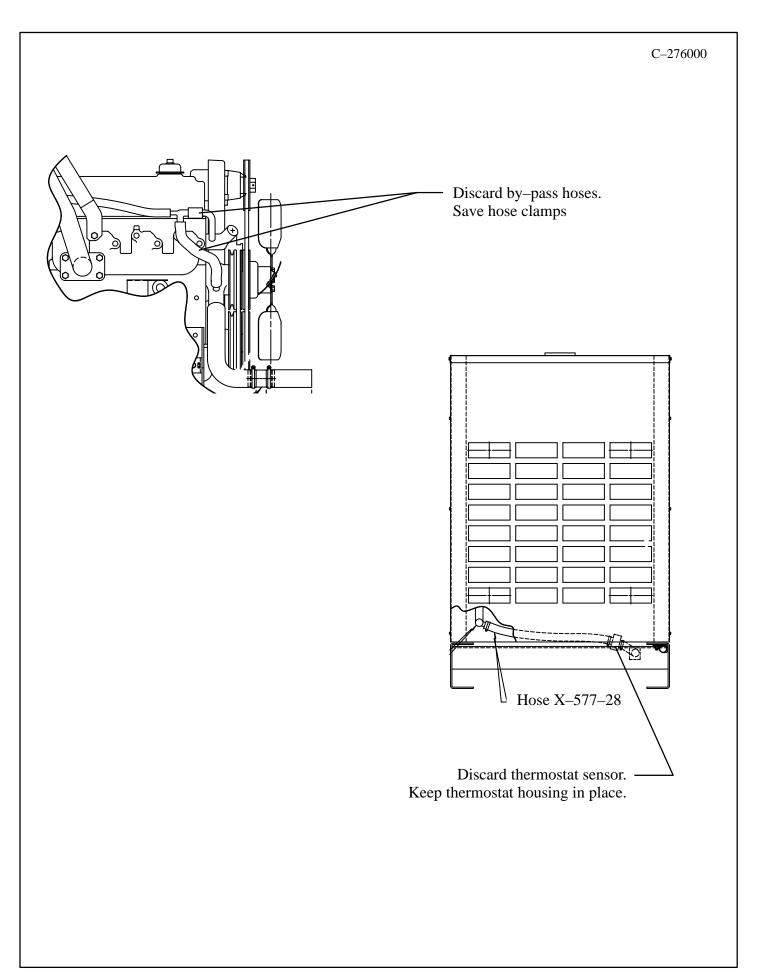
Thermostat Relocation 17 – 30RZ (4 Cylinder)
